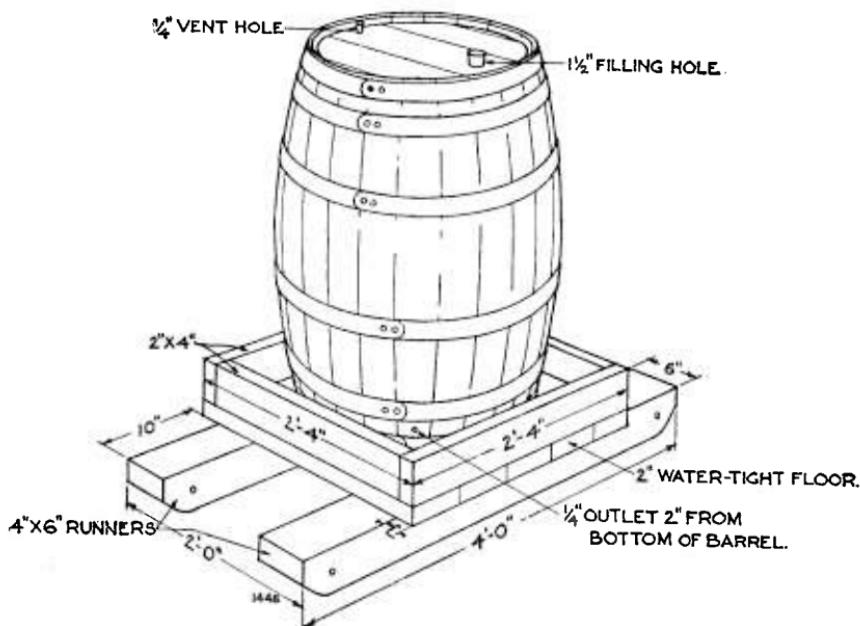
Detailed plan for construction of waterer shown in Figure 5. (Design No. 1448)
